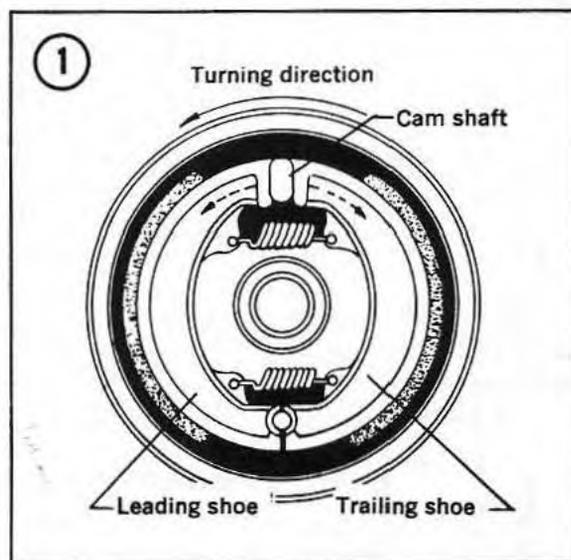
illustrates the major parts of the brakes. Squeezing the brake lever, on the handlebar, rotates the cam which in turn forces the brake shoes out into contact with the brake drum.
